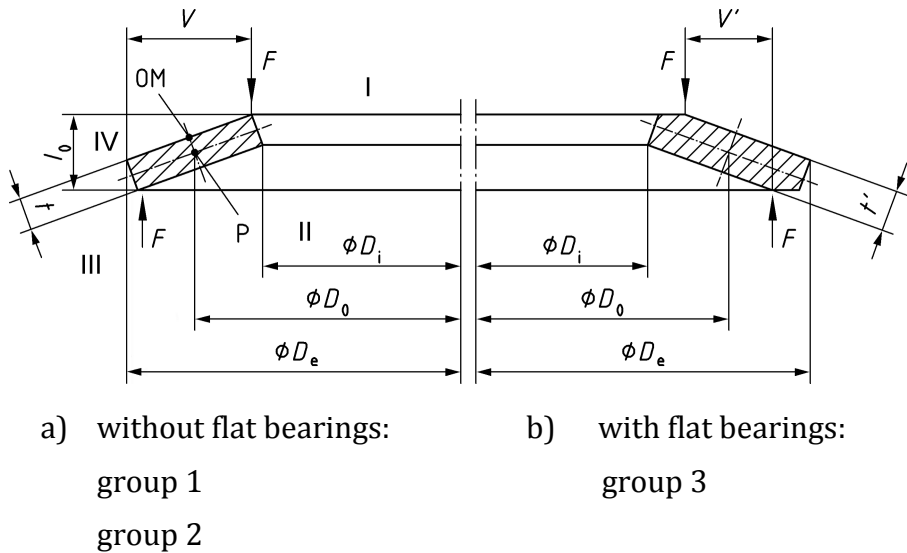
Single disc spring (sectional view), including the relevant points of loading
